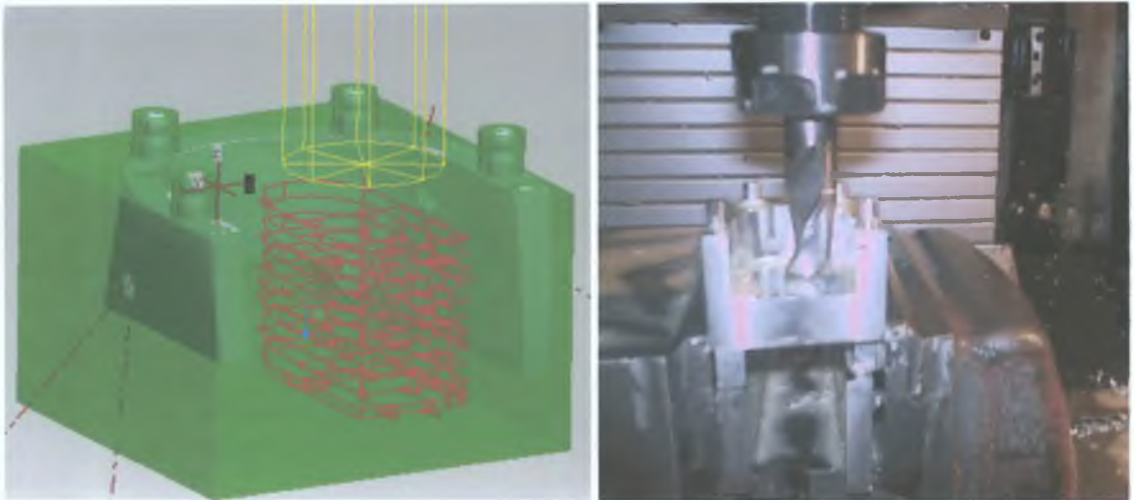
Volume Mill Sequence 1. (a) ProEngineer Tool Path. (b) Machined Work Piece.
